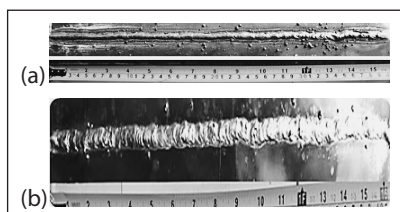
Bead appearance: (a) on-land welding, (b) underwater welding
